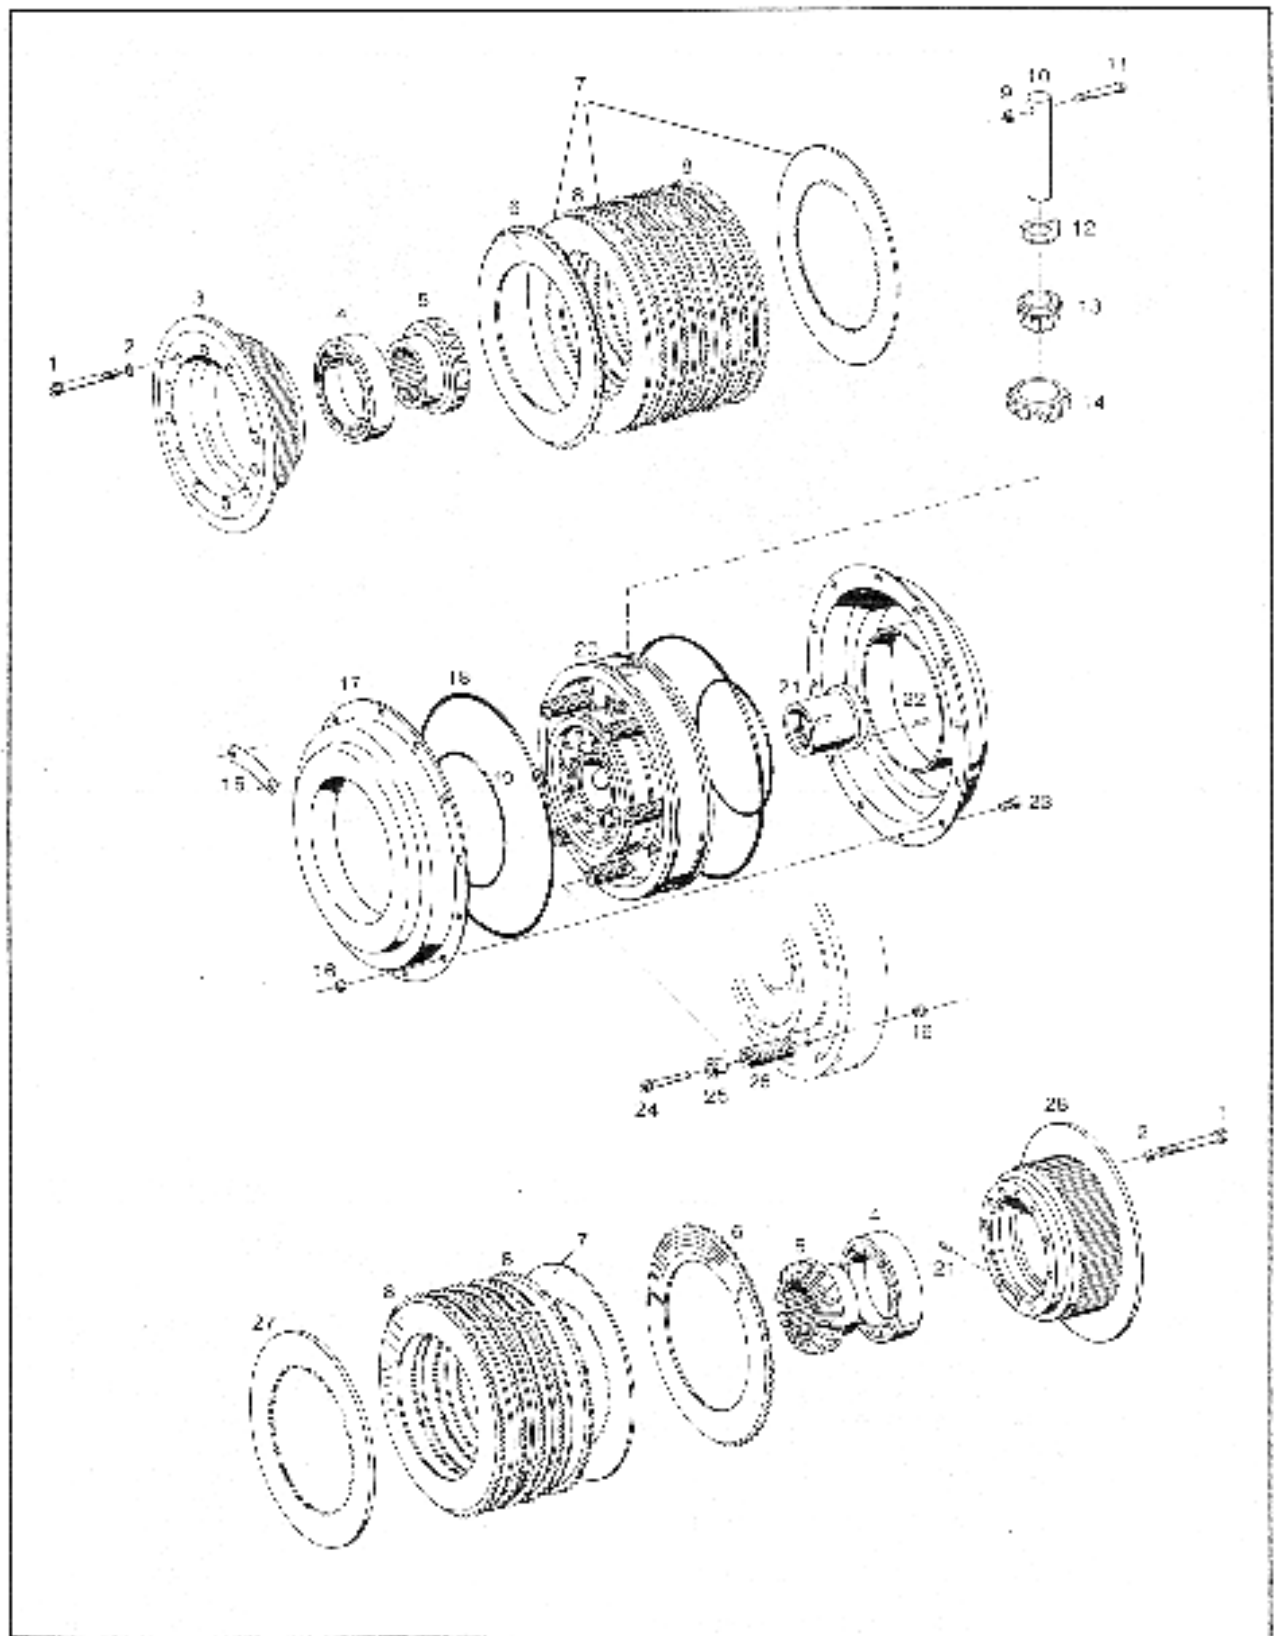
'HY' - 28000 Clutch and Gear Carrier Assembly
